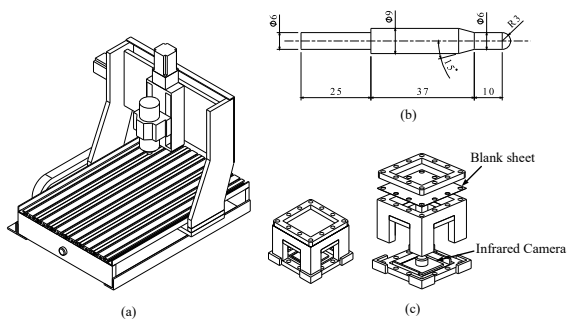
Machine, forming tool and fixtures for SPIF process; (a) Mini-CNC model LY 3040 (b) Forming tool, and (c) Fixture and infrared camera.
